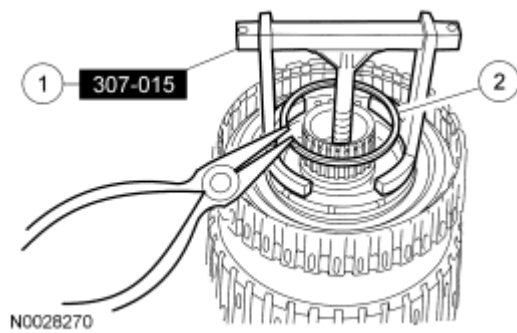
Forward/Coast Clutch Return Spring Retaining Ring & Special Tools
